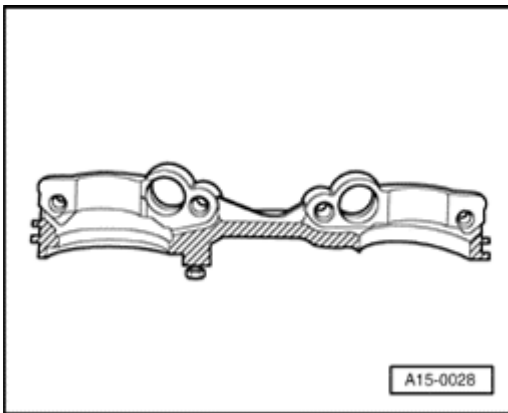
Identifying Double Bearing Cap Sealant Application Area
